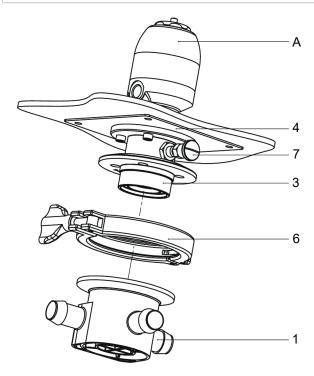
Disassembling the pneumatic stainless steel actuator – housing
